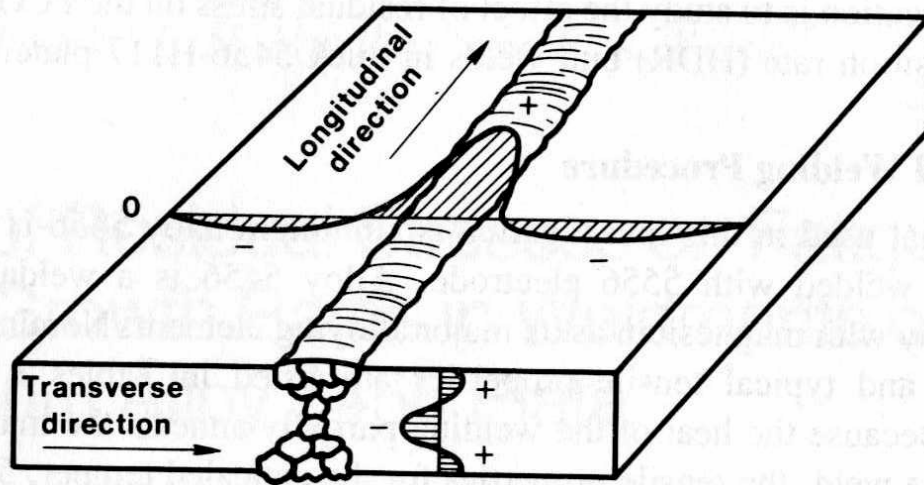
Drawing showing residual stress orientation in a conventional welded plate. [7, 8].
